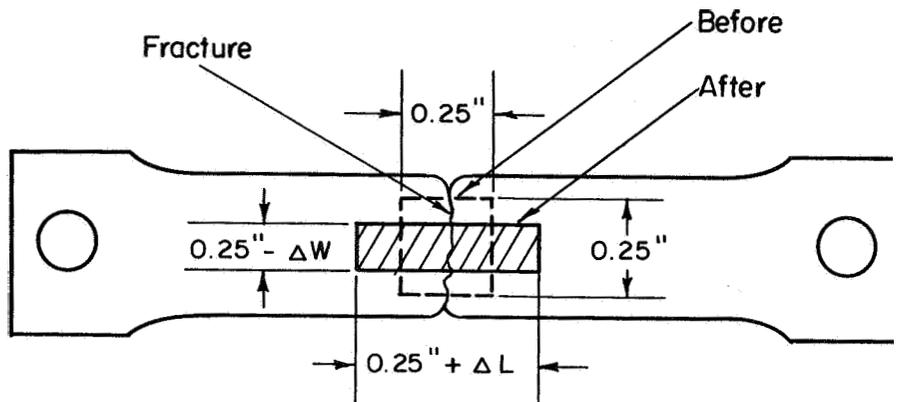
TYPICAL GRIDDED TENSION SPECIMEN (Ref. 69)
